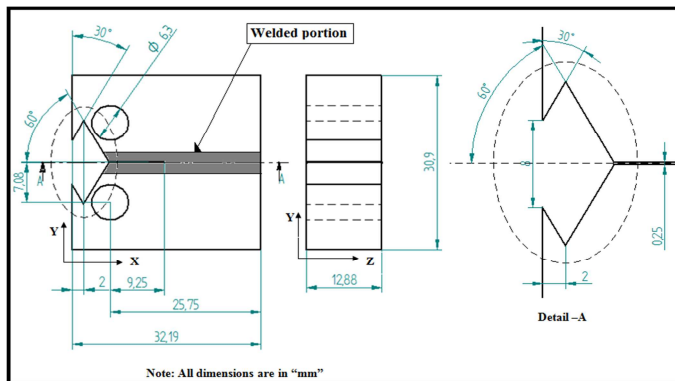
Dimension of CT specimen as per ASTM E-399 standard
